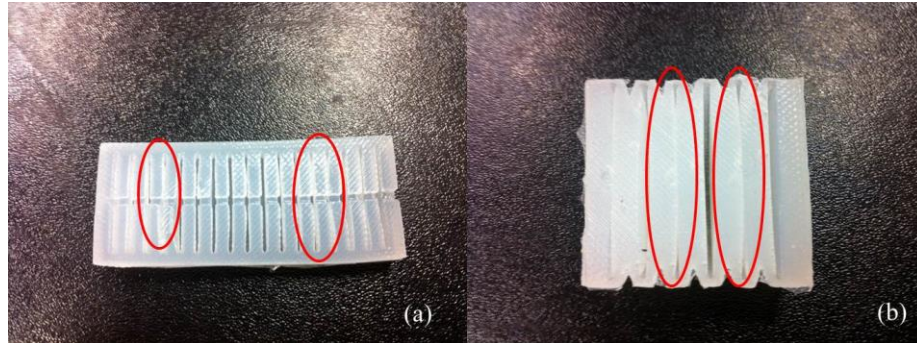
The glue Surfaces, (a) Mechanism V3; (b) Mechanism V2
